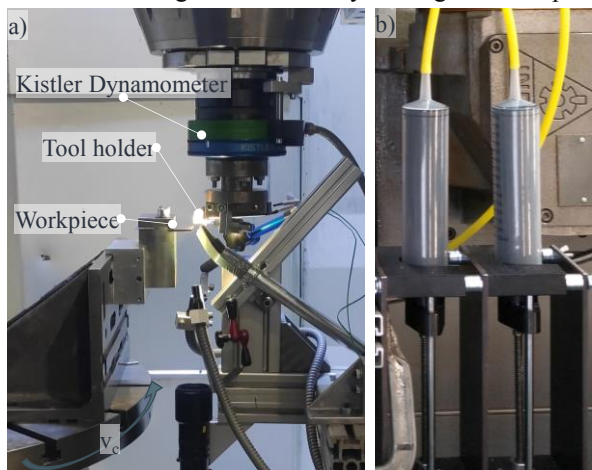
Orthogonal test set up; a) detail of tool and workpiece; b) stepper motors.
